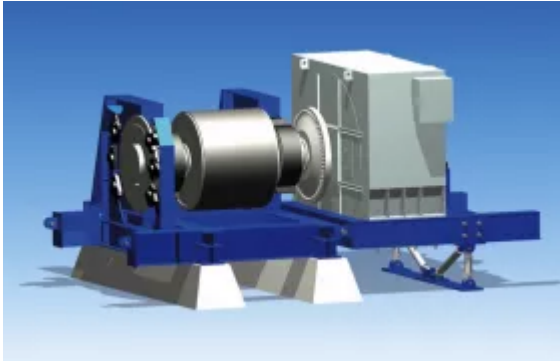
Motor with separate bearing, diaphragm coupling (patent pending), brake disc, drive pulley and the patent-pending support structure. (Picture: © Takraf)
